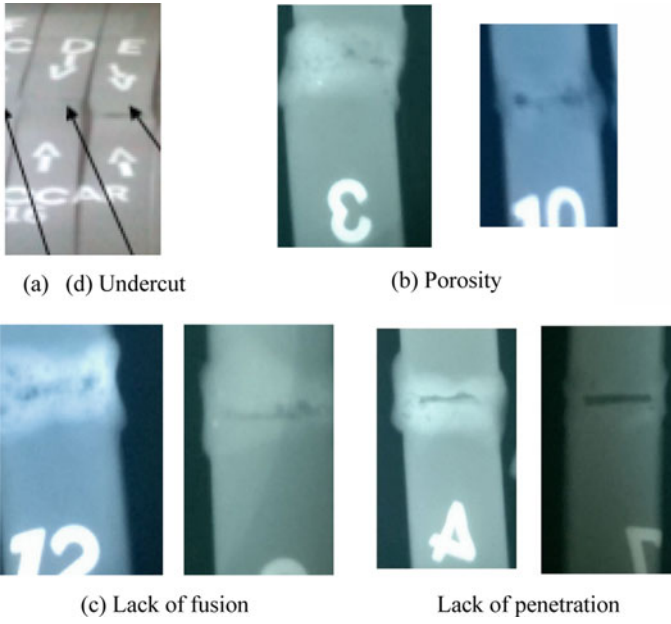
Radiographic images of ring specimens with weld defects a undercut b porosity c lack of fusion d lack of penetration
